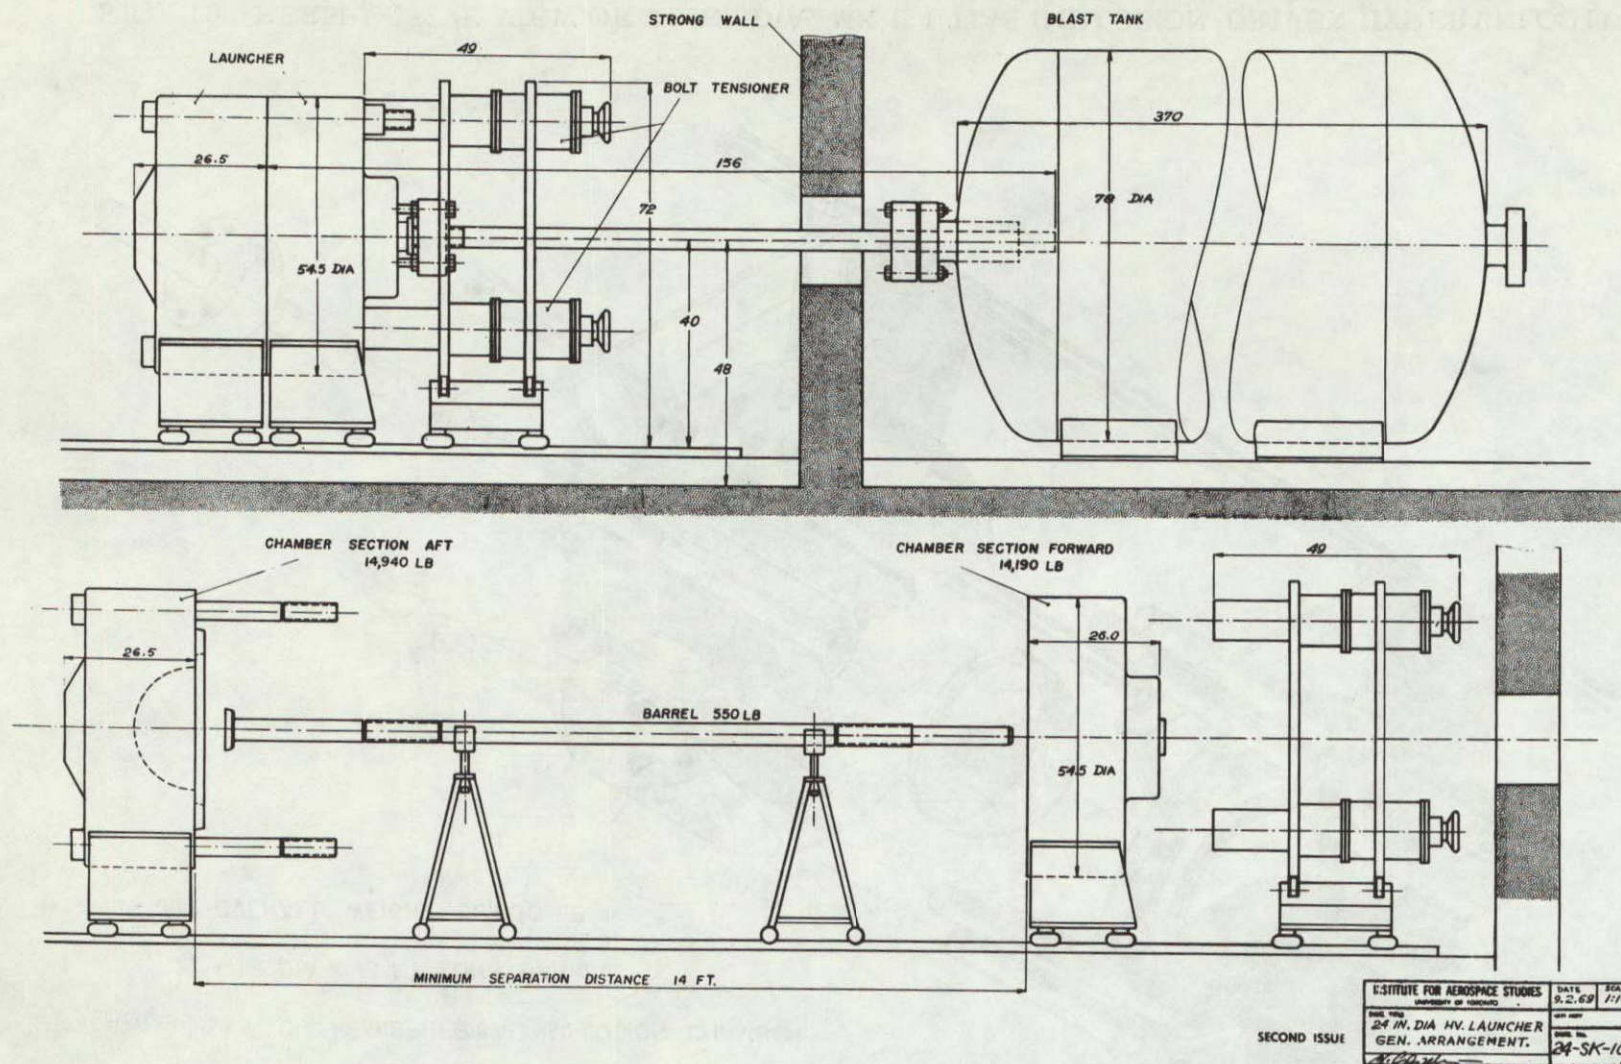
SKETCH OF LAUNCHER ASSEMBLY SHOWING THE BOLT-TENSIONER MECHANISM
